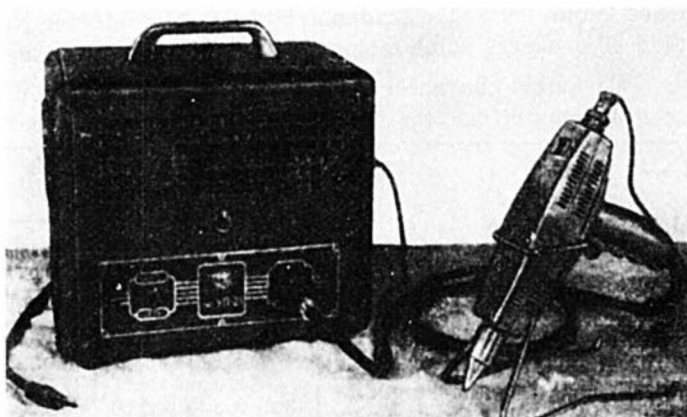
The UP-21 ultrasonic soldering bit and its generator
